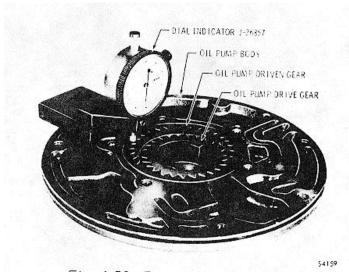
Dial indicator check of oil pump driven gear end clearance
